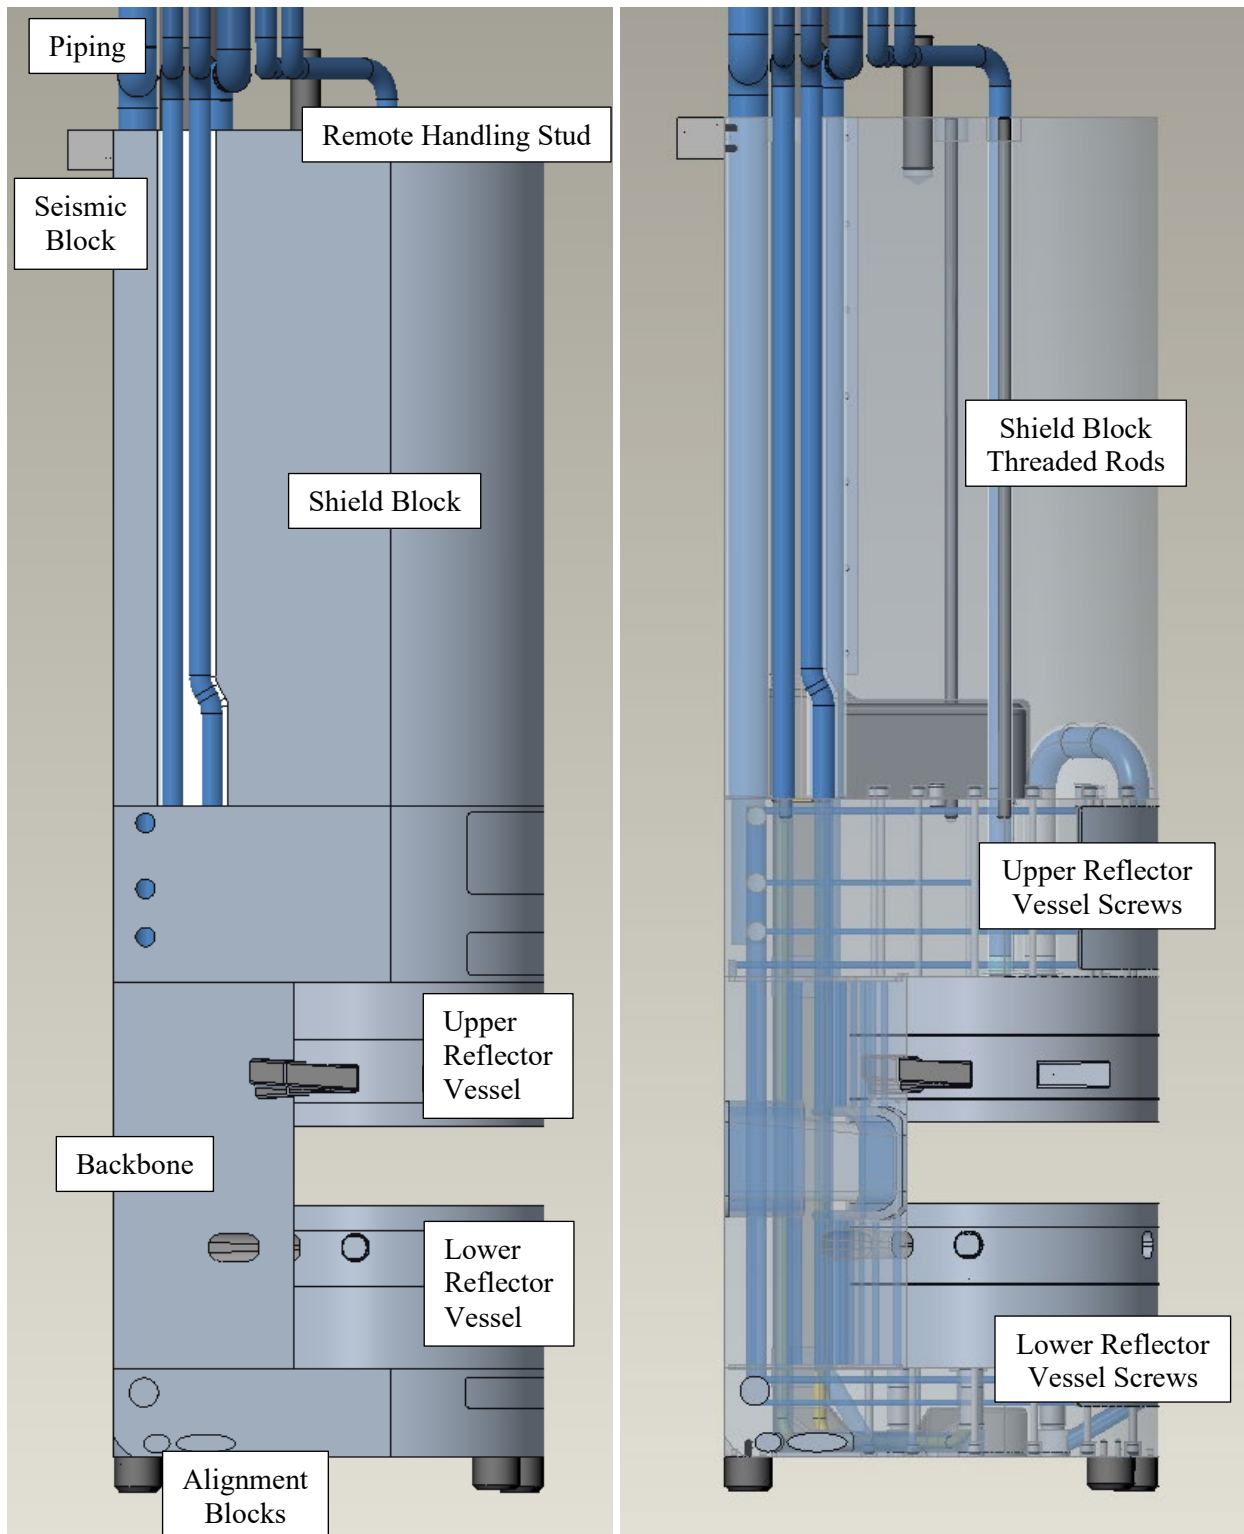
Moderator Reflector Assembly Geometry (left) and Transparent View to show Fasteners (right)
